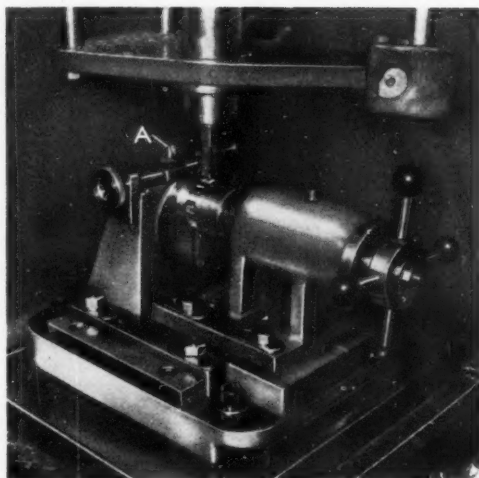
At this Set-up on a 30-ton Hi-Ton Hydraulic Press, the Radial Roller Pockets are Broached in Two Passes, Using Short 10-tooth Broaches
